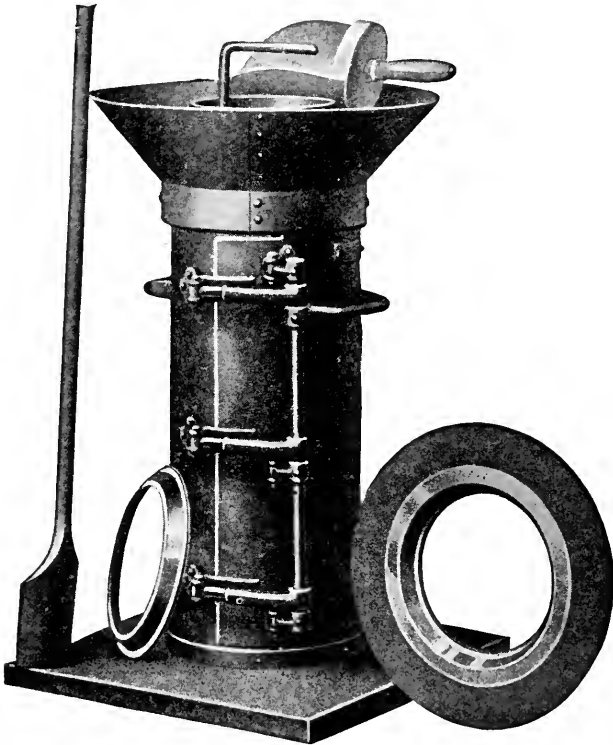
Pipe molds for hand-tamped cement pipe.
